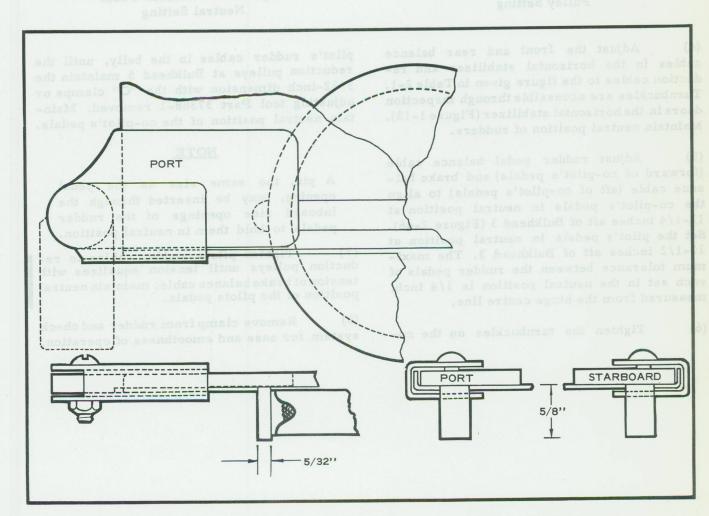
Adjusting Tool, Reduction Pulley Rudder Control
